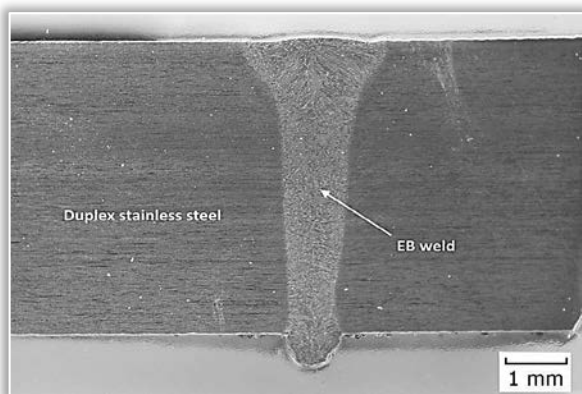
Macrostructure of cross-sectional view of the EBW joints with 30 mm.s^{-1} welding speed and average oscillation 1 mm
